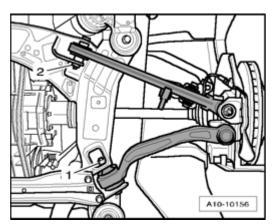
Removing Guide Control Arm And Control Arm On Subframe
